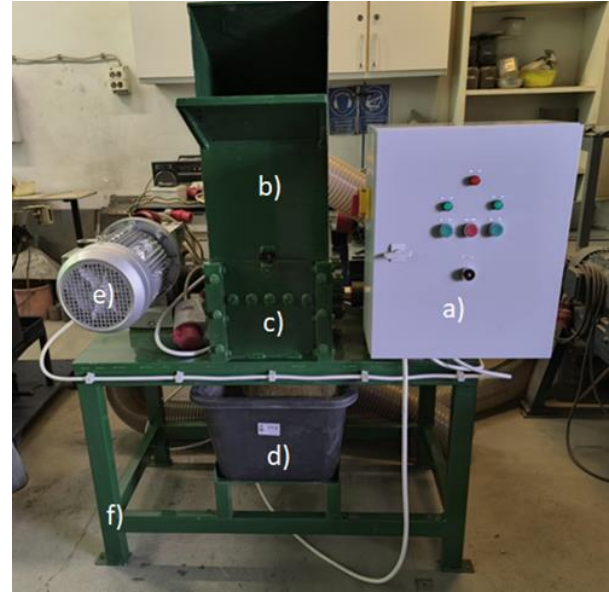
The constructed axial-gap rotary shear and its main units: (a) electrical control box, (b) feed hopper, (c) shearing chamber, (d) product collection container, (e) drive motor, and (f) supporting frame.
